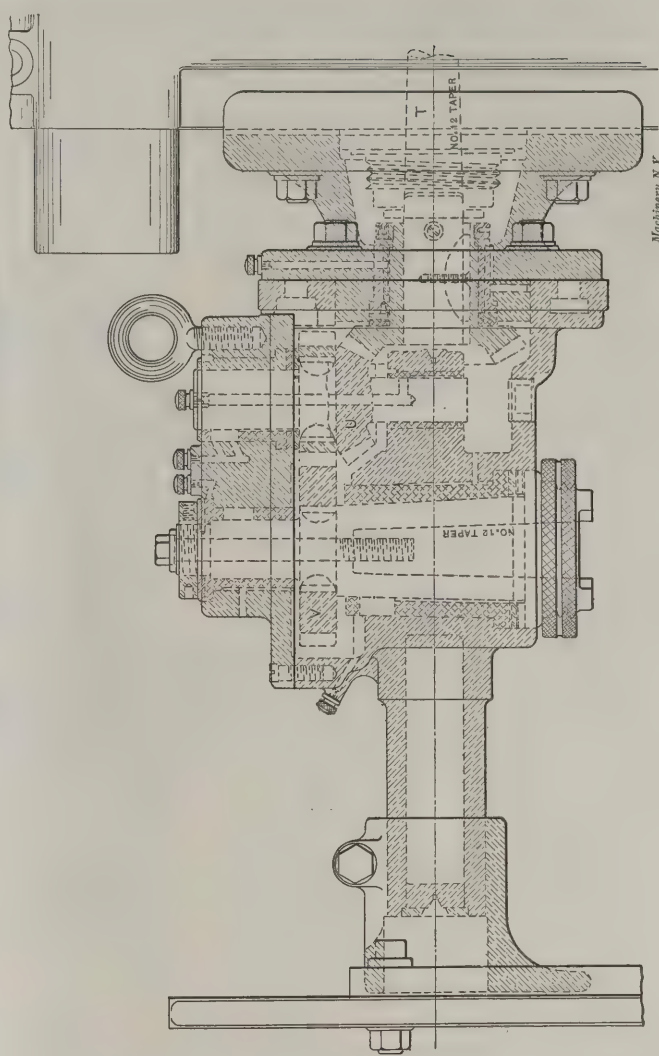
Mechanism of Vertical Milling Attachment shown in Fig. 2.
